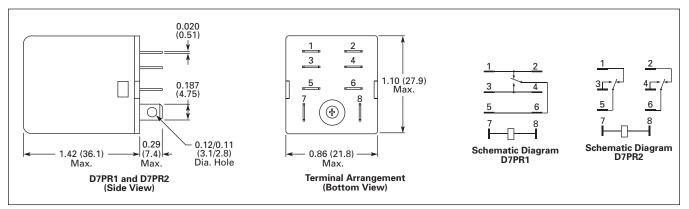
D7PR1 and D7PR2 — Approximate Dimensions in Inches (mm)
